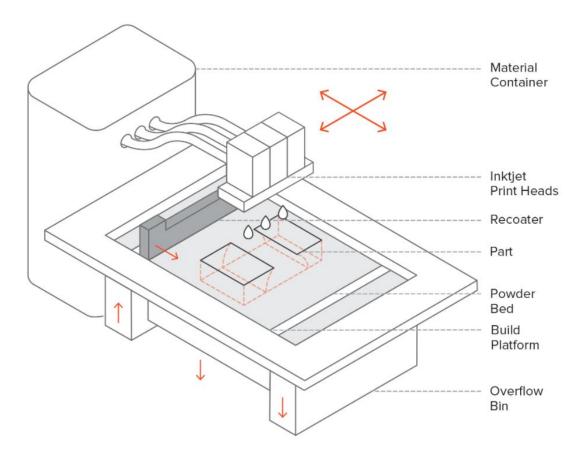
Schematic of a Binder Jetting 3D printer
